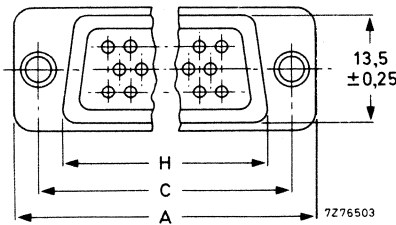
Terminal side of pin (or socket) connector; see also Table 5.
